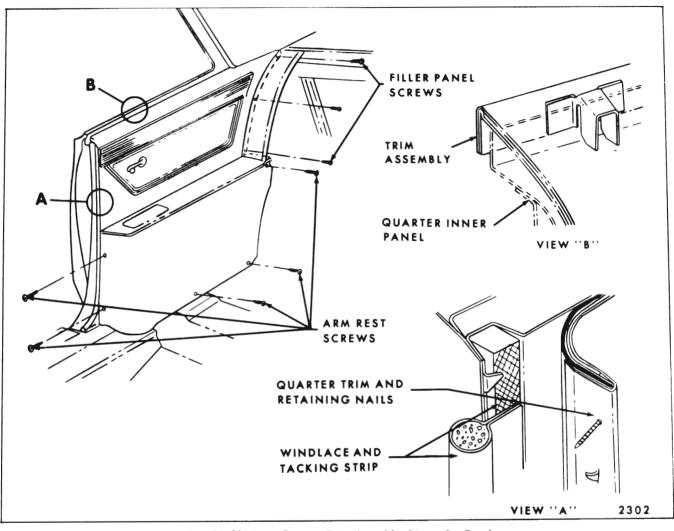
Rear Quarter Trim Assembly (Hang-On Type)
